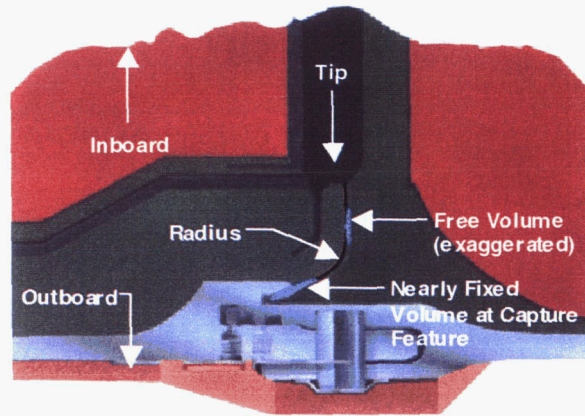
J-joint Assembled Configuration Prior to Motor Operation Showing Uncompressed Free Volume
